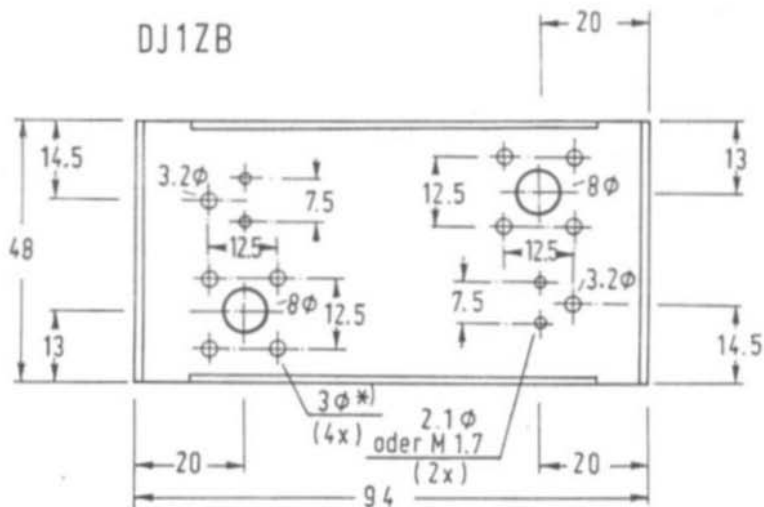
Holes in the base plate (x = dia. to suit the coaxial connectors used)
